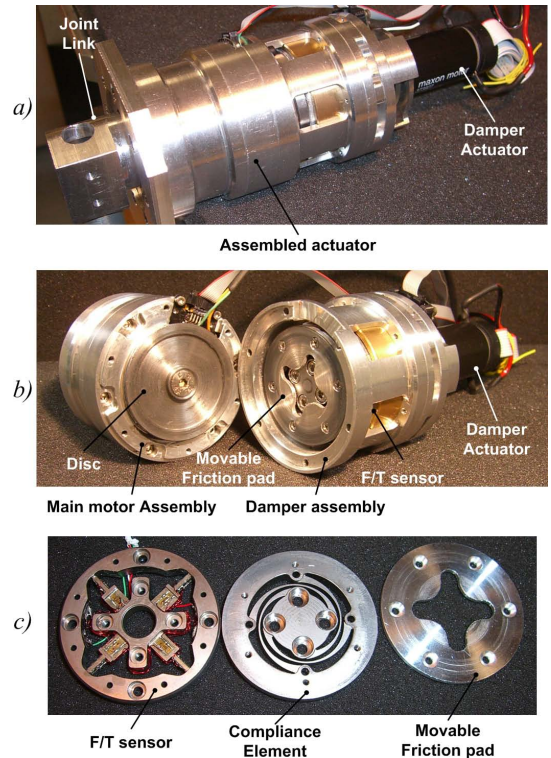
The developed variable damping actuator a) Complete assembly b) Main motor and damper assemblies exposing the brake disk, c) The F/T sensor, compliance element and movable friction pad.
